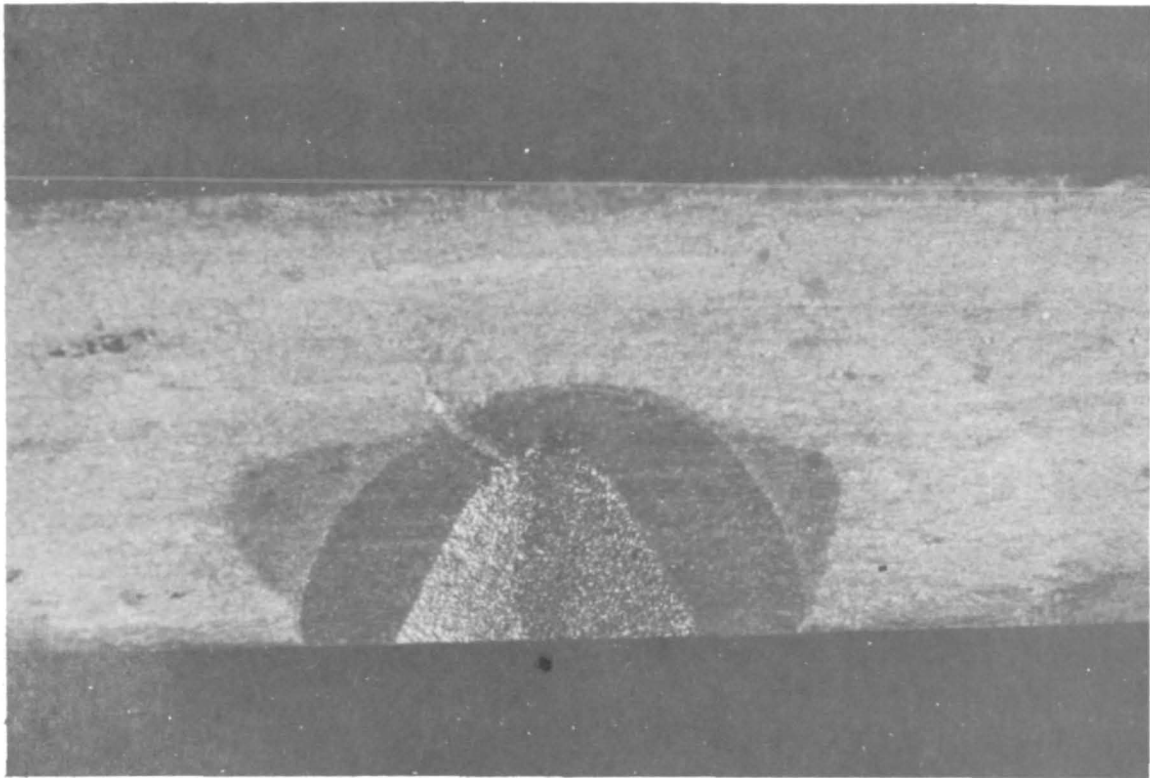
Fractograph and flaw map of specimen TOL-6.
